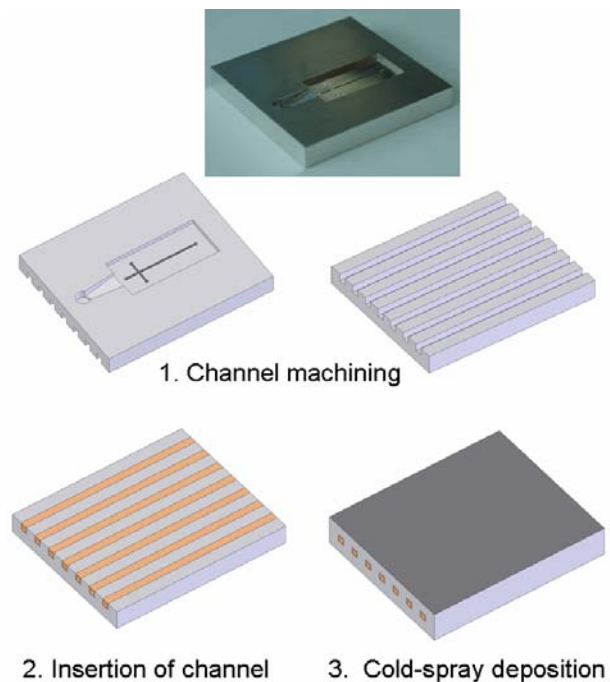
Fabrication of channel using support structure and cold-spray in injection mold
